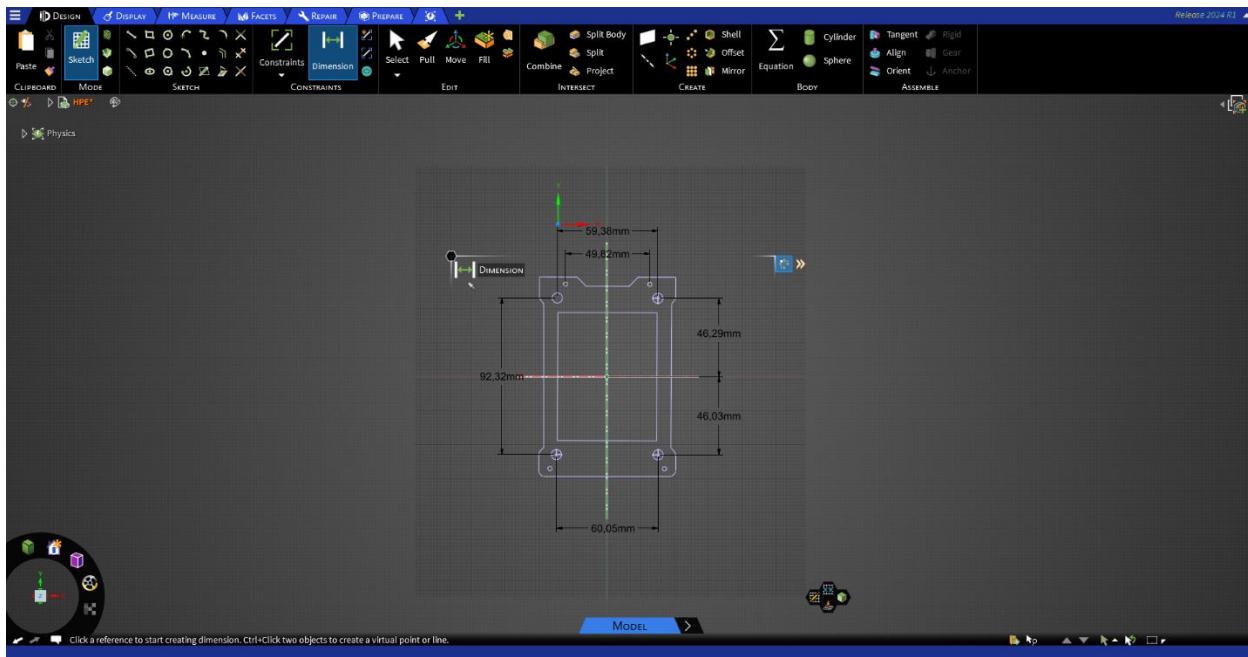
Heatsink attachment mechanism cross-sectional view and mounting details
